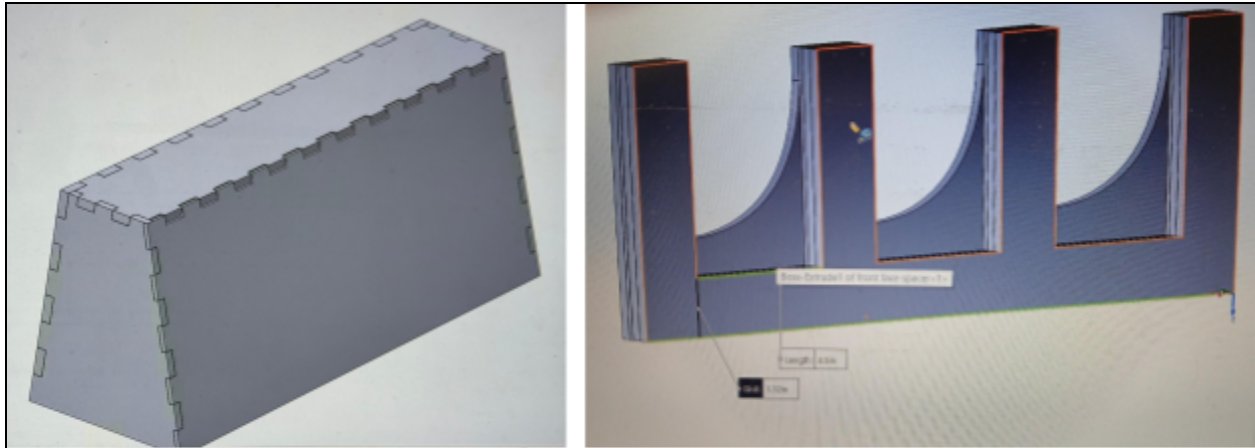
CAD of finger joints on solid mount (left). CAD of layered lid design (right).
